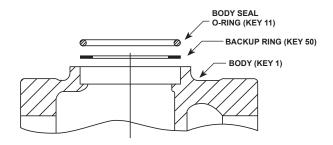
Expanded View of the Body Area Showing the O-ring and Backup Ring Placement
